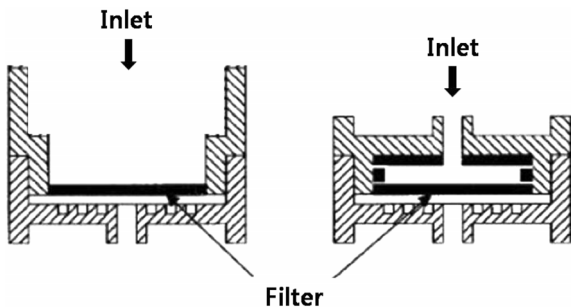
Cross-sections of the open-face and modified 2-piece cassette holder
